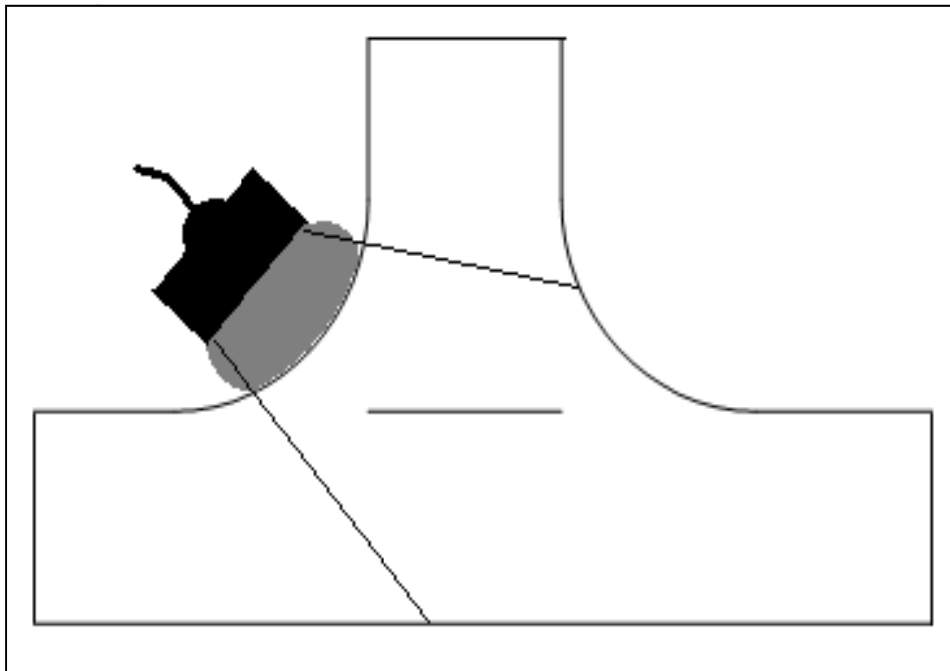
General drawing of the cross section of a T-joint showing the probe position.
